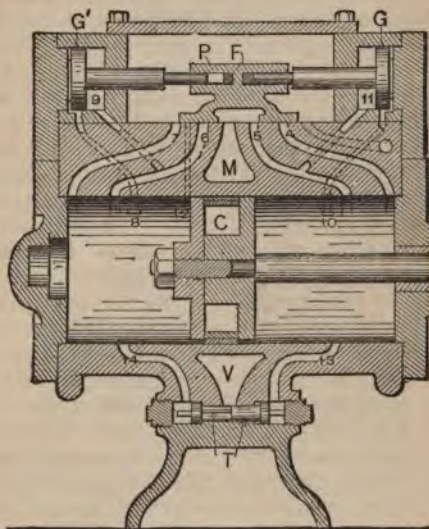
CARRICABURU STEAM END, LENGTH-WISE SECTION.
